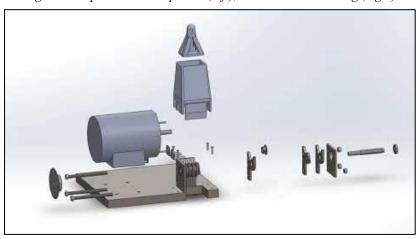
CAD Assembly Animation (https://www.youtube.com/embed/N8GbXt\_aRRw?feature=oembed)
